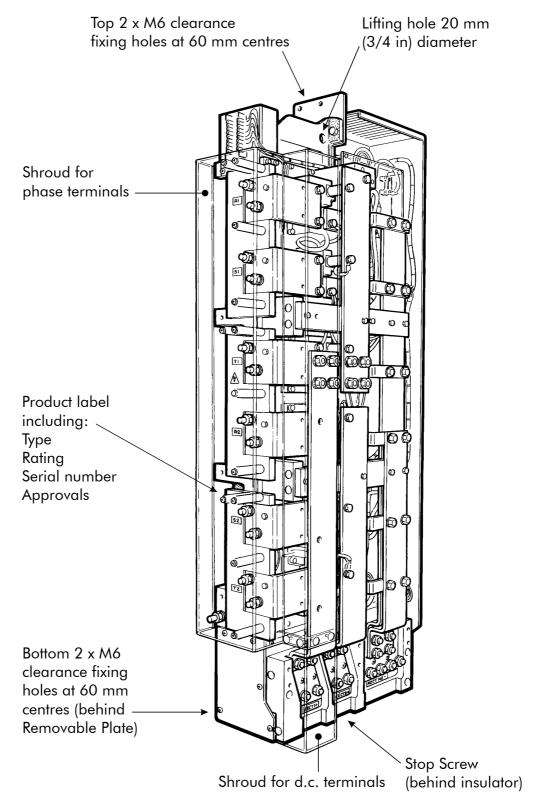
Typical View of a MV LCD Rectifier Bridge Module showing Mechanical Details
